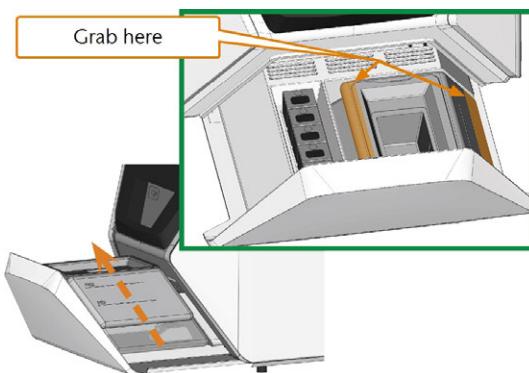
REMOVING THE COOLING LIQUID TANK FROM THE MULTI-PURPOSE DRAWER
